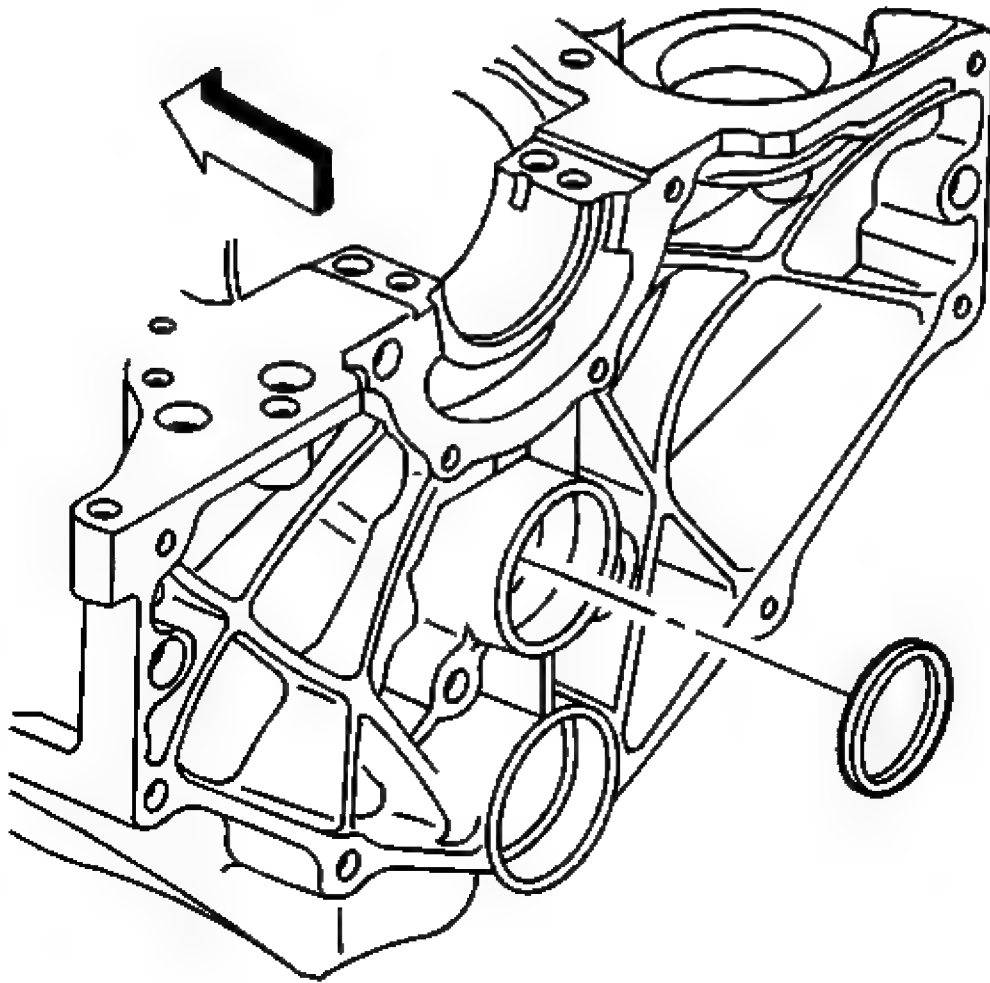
Locating Expansion Cup Plug For Camshaft Rear Bearing Hole
